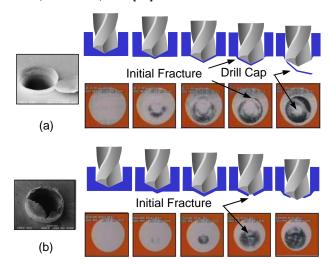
Proposed burr formation mechanisms, (a) uniform burr, (b) crown burr [17].
